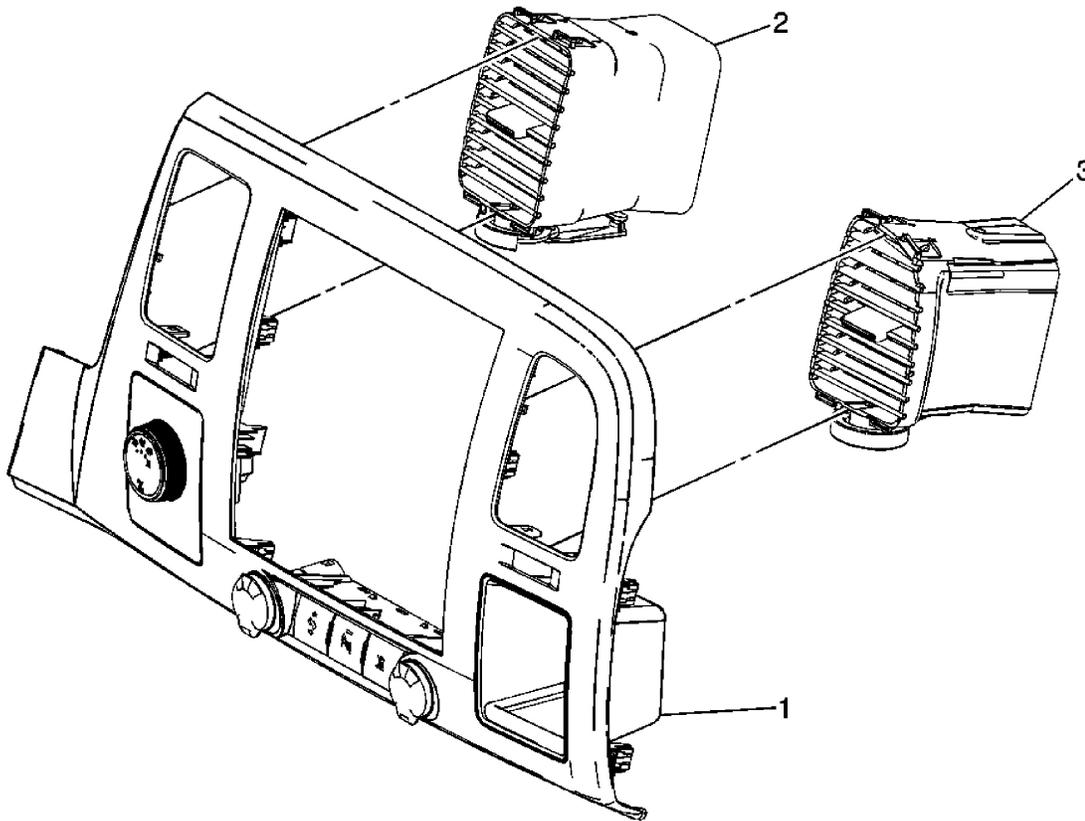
View Of Instrument Panel Accessory Trim Plate & Air Outlet Assemblies
